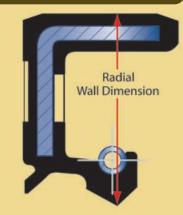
Radial Distance Between Seal O.D. & Seal Contact Point
